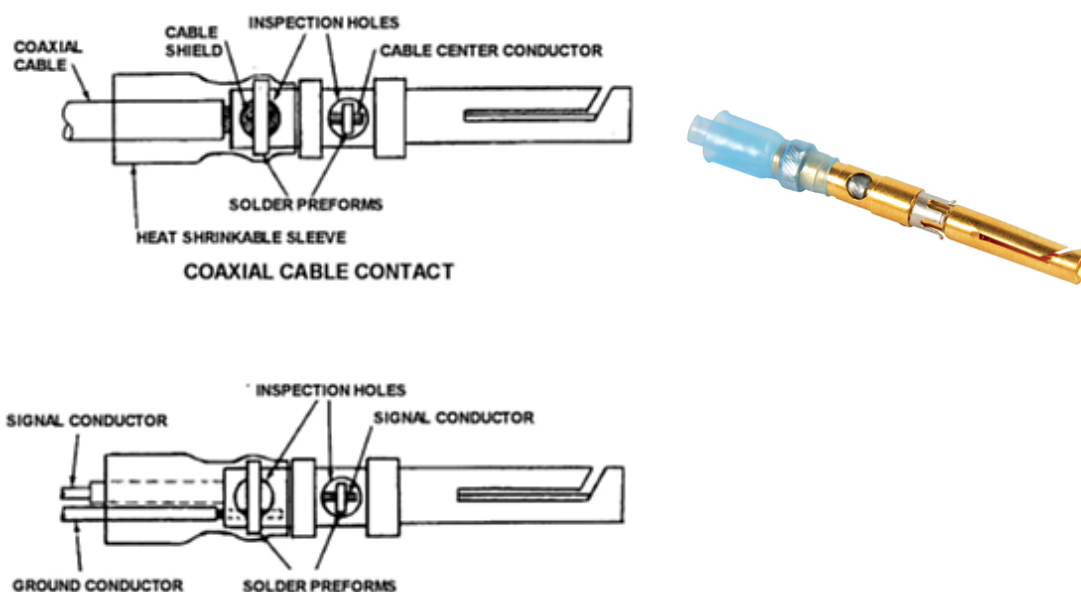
Examples of solder contacts SAE AS39029/73 and /74 typical configuration.
